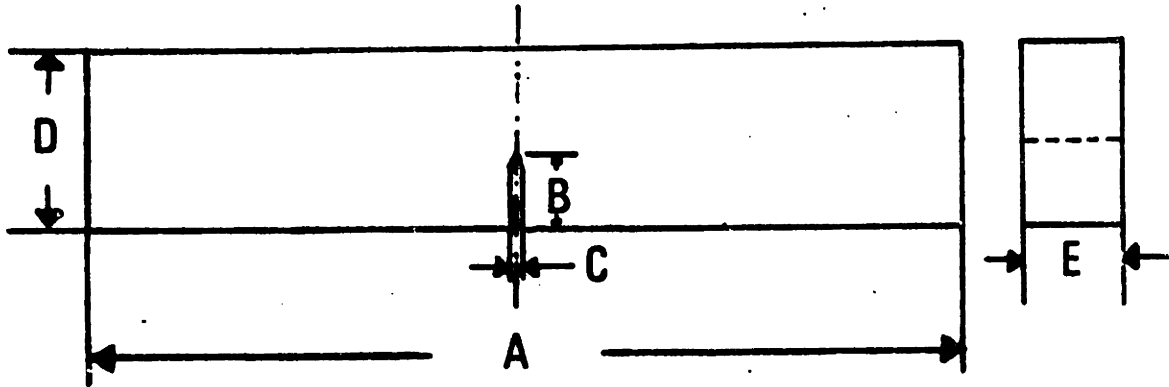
Fracture toughness specimens. Dimensions in mm.
